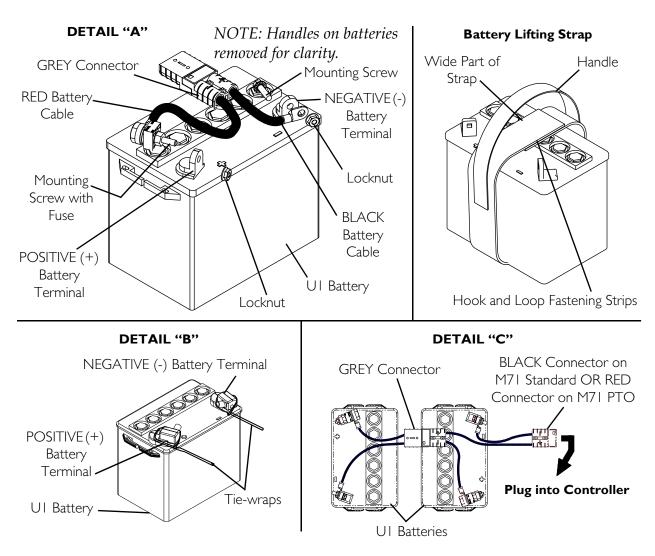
Connecting/Disconnecting Battery Cables - Wheelchairs Manufactured After 7/14/03
